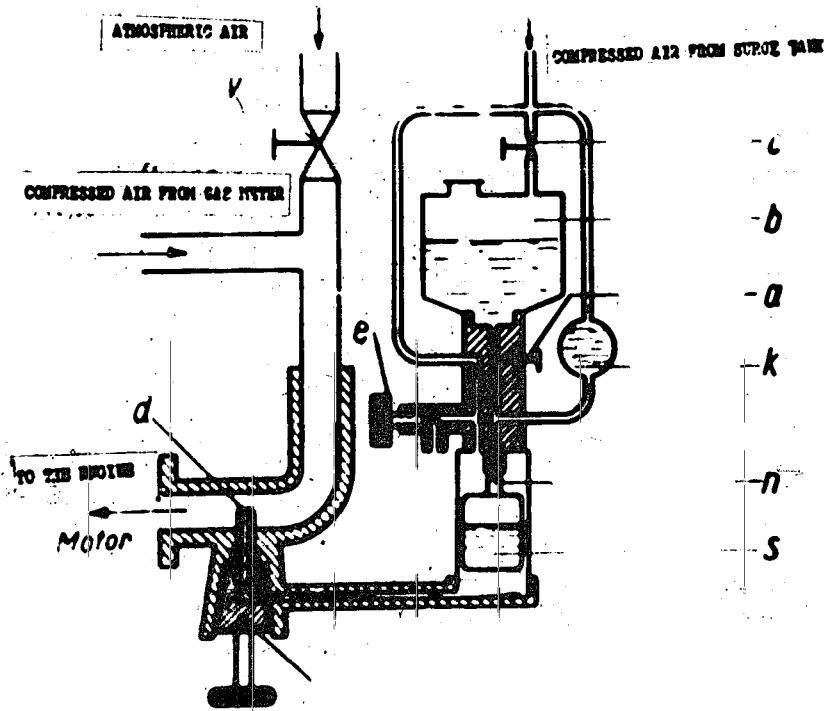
DIAGRAM OF THE PRESSURE CARBURETOR
